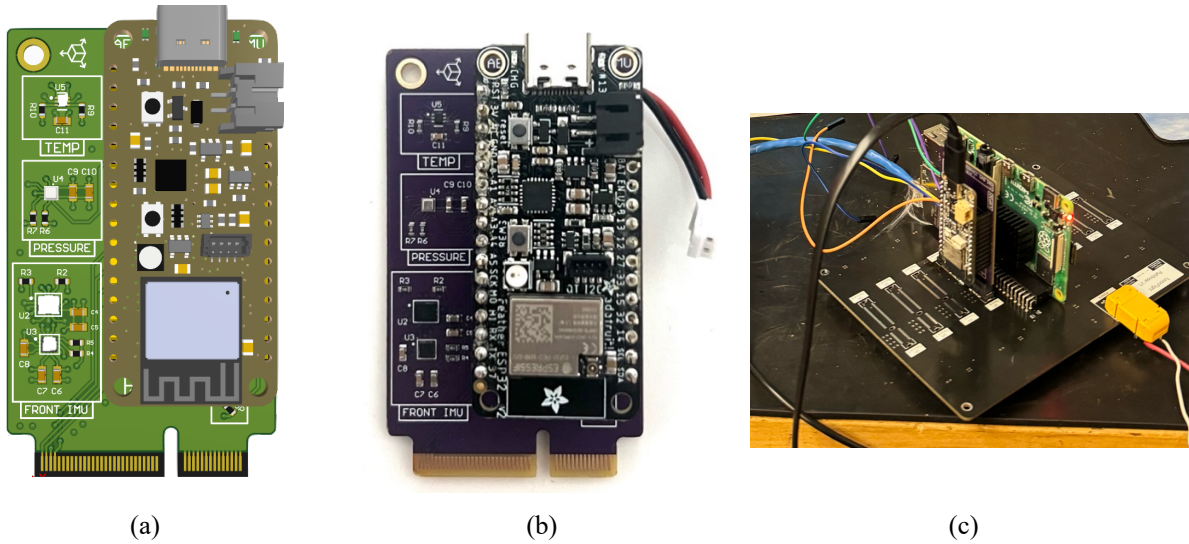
(a) IMU PCB model; (b) assembled IMU board. Additional testing is to be carried out to investigate the inclusion of IMU data to augment GPS positioning accuracy. (c) IMU board attached to a partially assembled CCB for testing.
